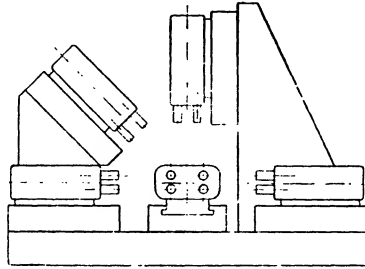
DIAGRAM OF MULTIPLE UNIT MULTI-SPINDLE DRILL FOR A SPECIAL PURPOSE
